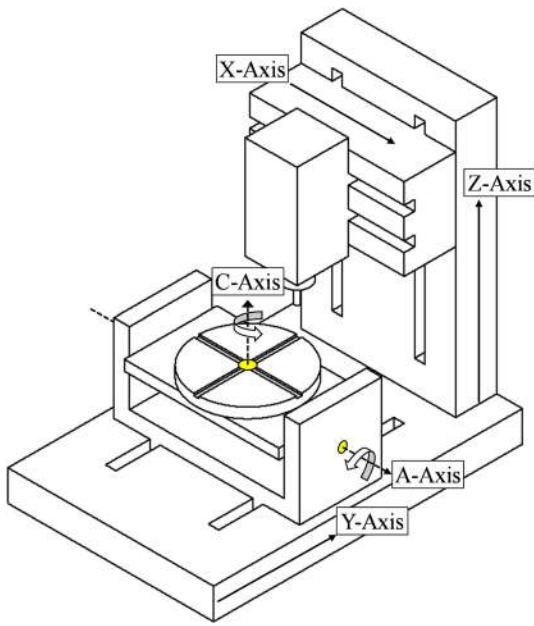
Schematic of a rotating/tilting table of a TRT-CA type machine tool
